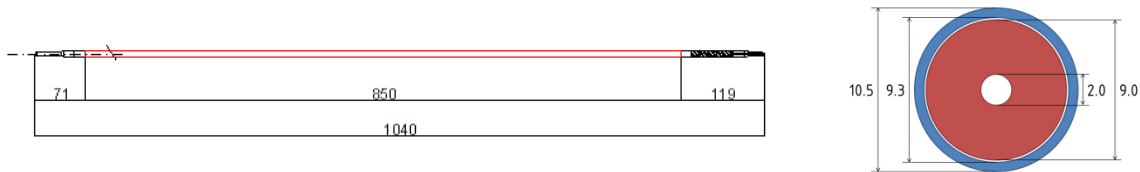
Vertical (left) and horizontal (right) cross-section views of the LFR-AS-200 fuel pin.
